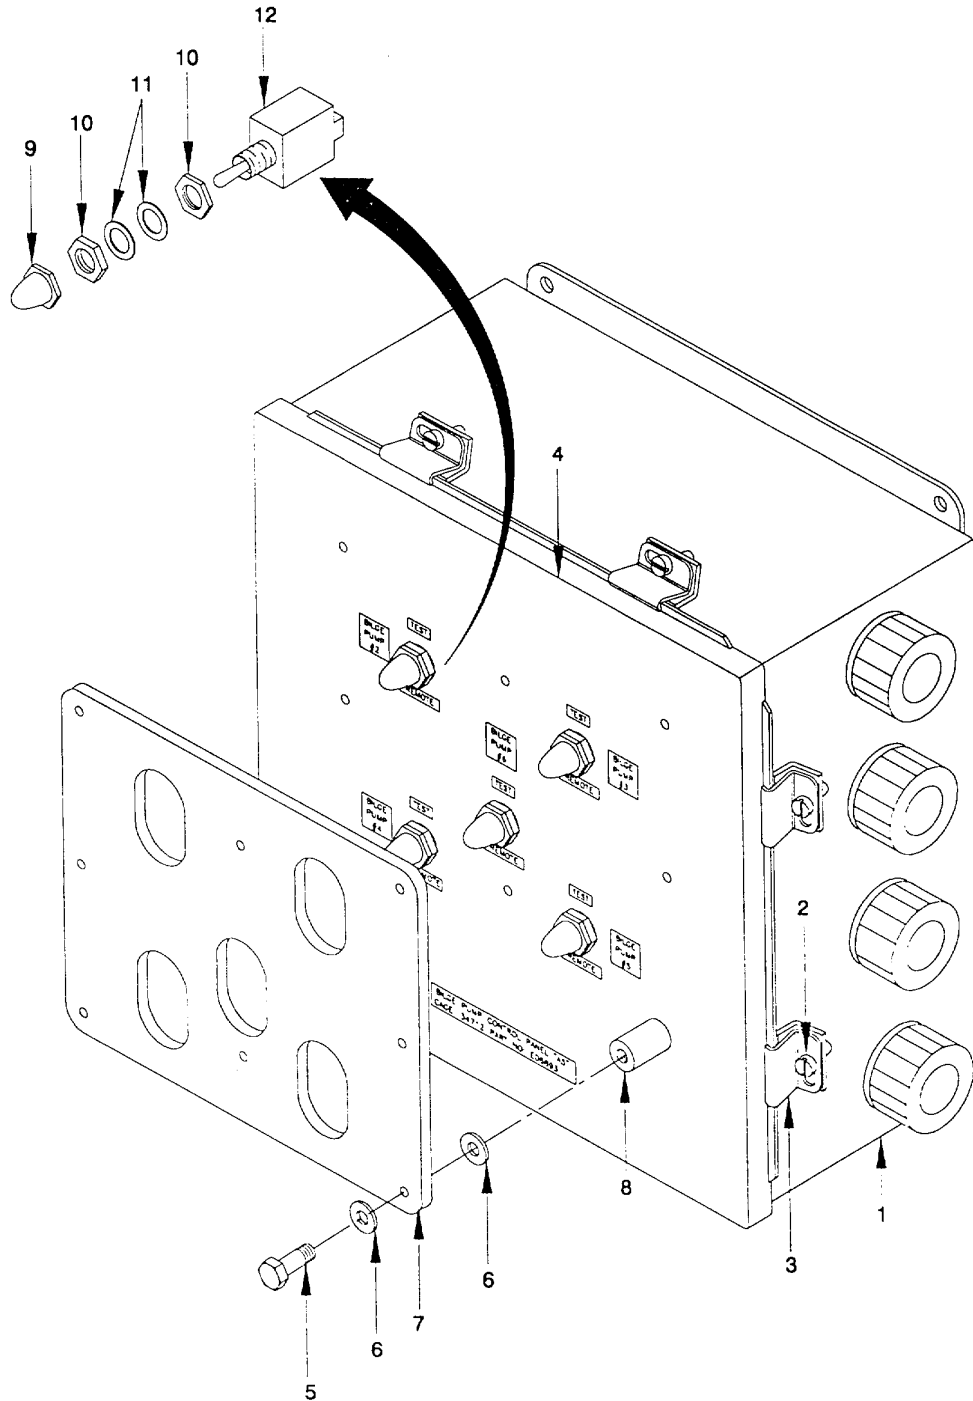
Toggle Switch, Bilge Pump Control Assembly "A5". Remove/Install
